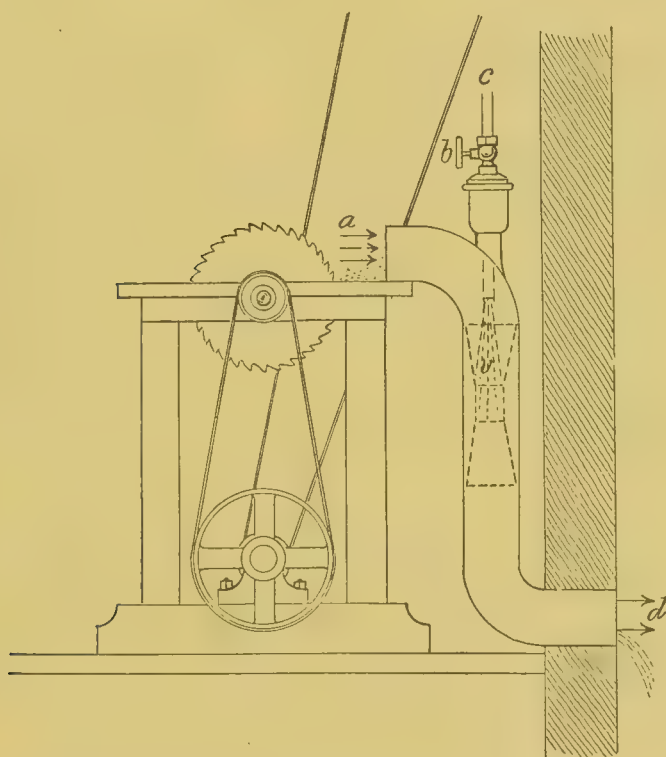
Apparatus for removing dust in manufacturing establishments: *a*, inlet to exhaust shaft; *b*, valve regulating spray; *c*, water-supply pipe; *d*, outlet of exhaust shaft.
